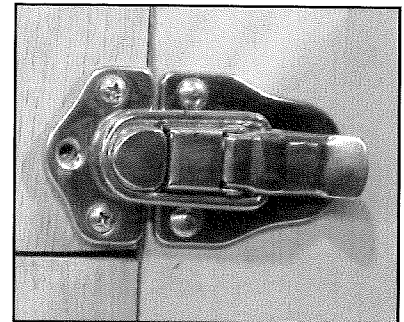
Temporarily using machine screws makes it easier to locate mating pieces during fitting. Screws will be replaced with threaded rivets after the trunk is covered.
